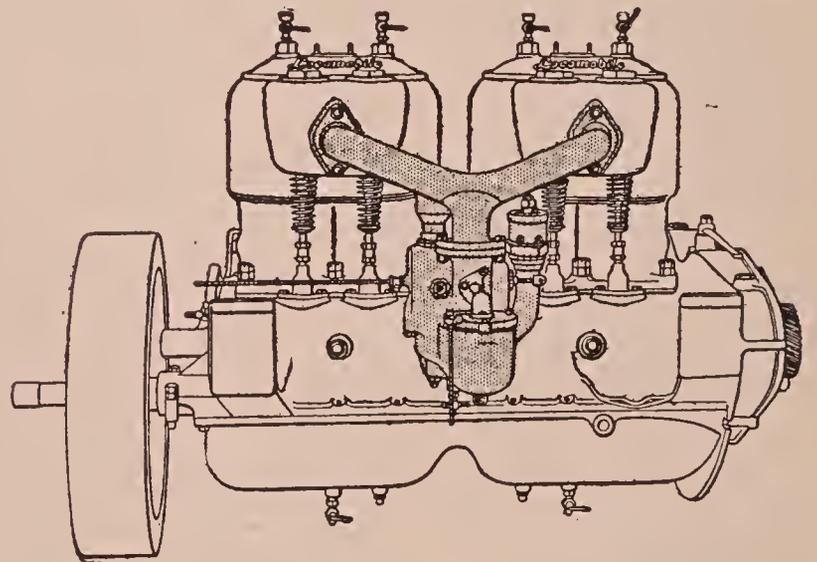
The inlet side when the wiring, water pipes, standpipes and magneto have been removed.
